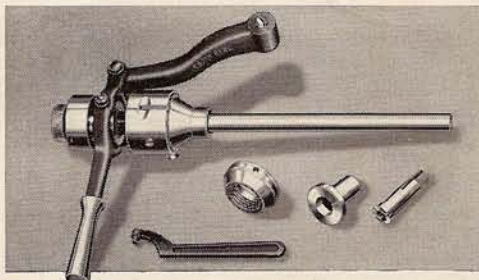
Hand Lever Type Draw-in Collet Chuck Attachment. Must be fitted to Lathe at Factory.
